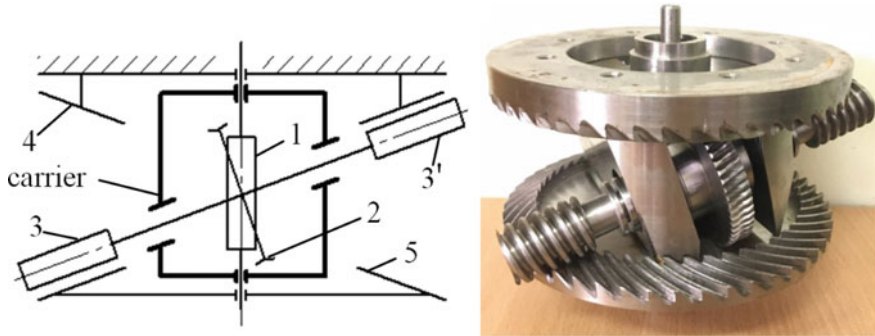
Scheme and prototype of planetary worm and spiroid gear
